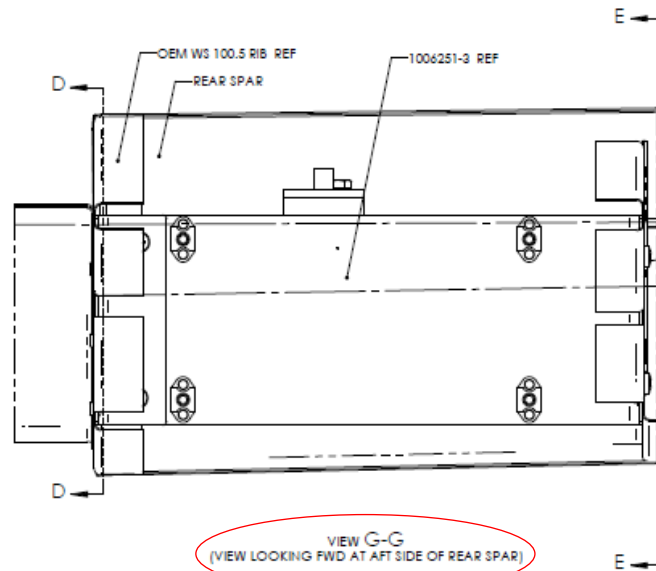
ROLL SERVO INSTALLATION ON MOUNTING PLATE
